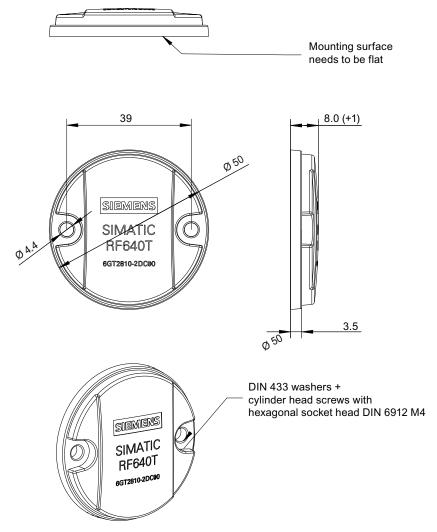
SIMATIC RF640T Gen 2 UHF Tool Tag Version 1
